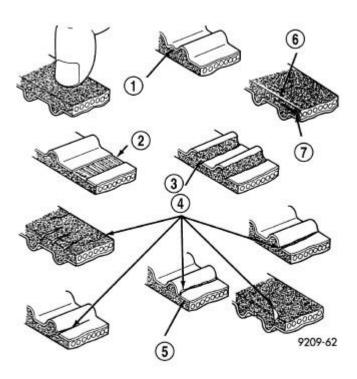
Timing Belt Inspection Courtesy of CHRYSLER LLC
